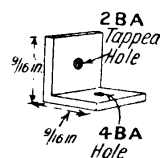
Right-angle brass strip for spindle bearing is bent and drilled
